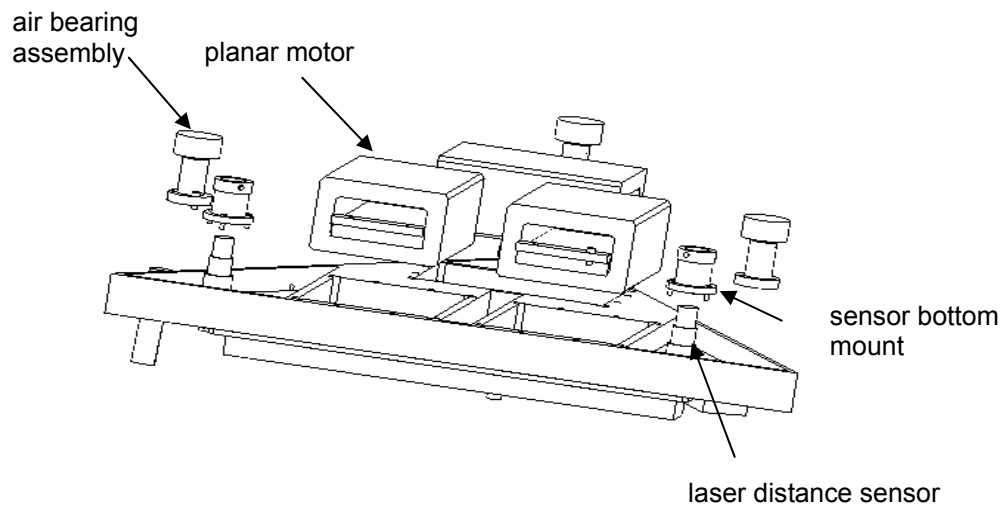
Exploded view of the assembly of the parts at the bottom [after Bhat]
